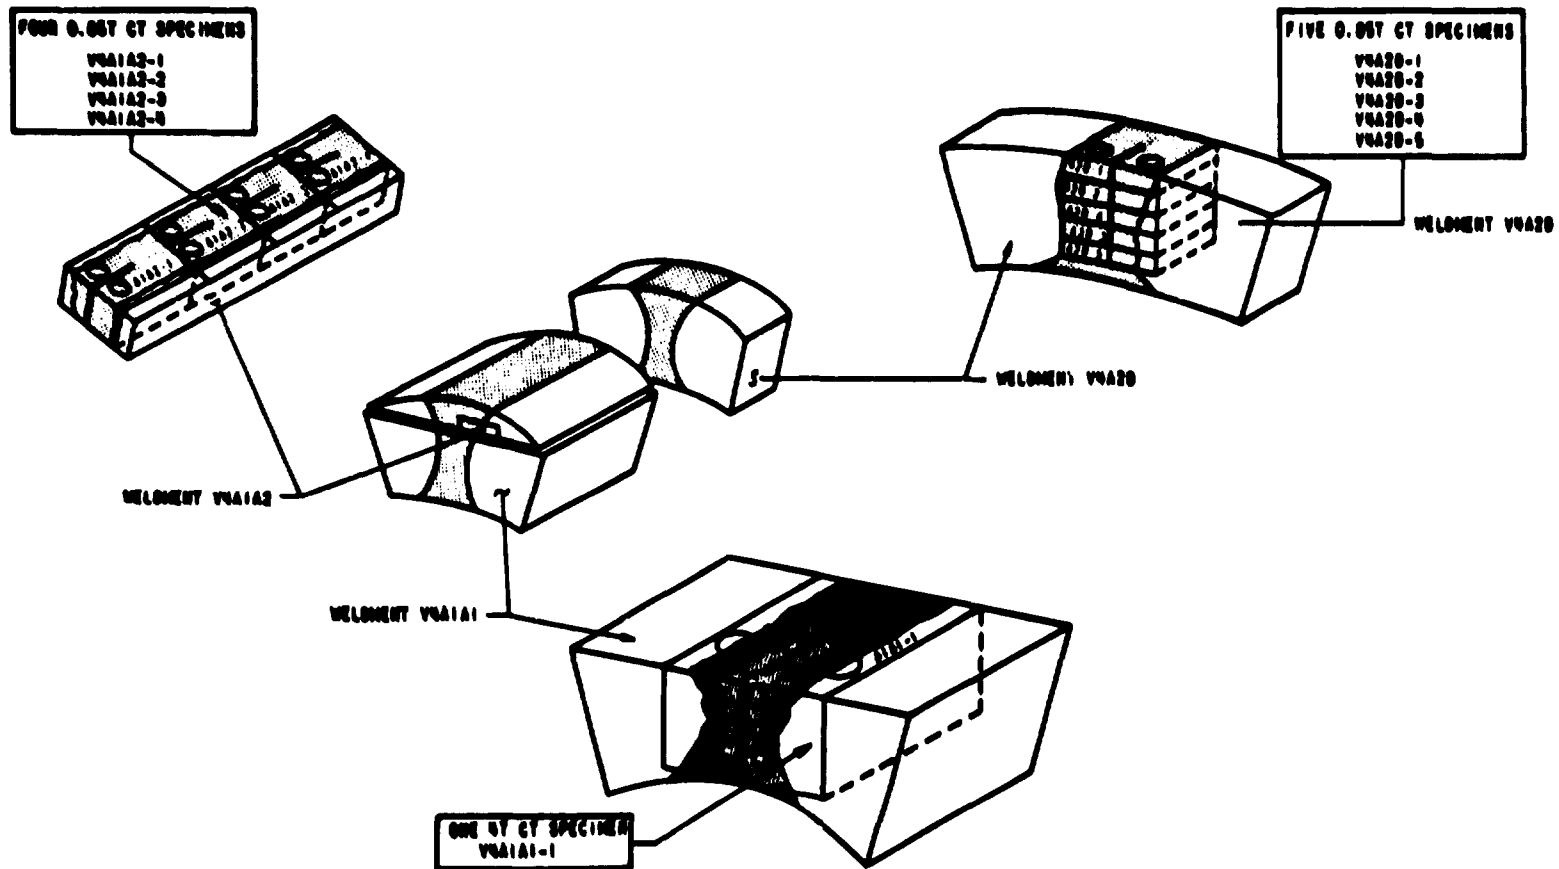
Machining of fracture toughness specimens from IIBT intermediate pressure vessel V-4 weldment.
